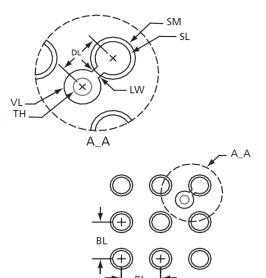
Board Layout of Soldered Pad for QFN Devices according to Intersil TB389
